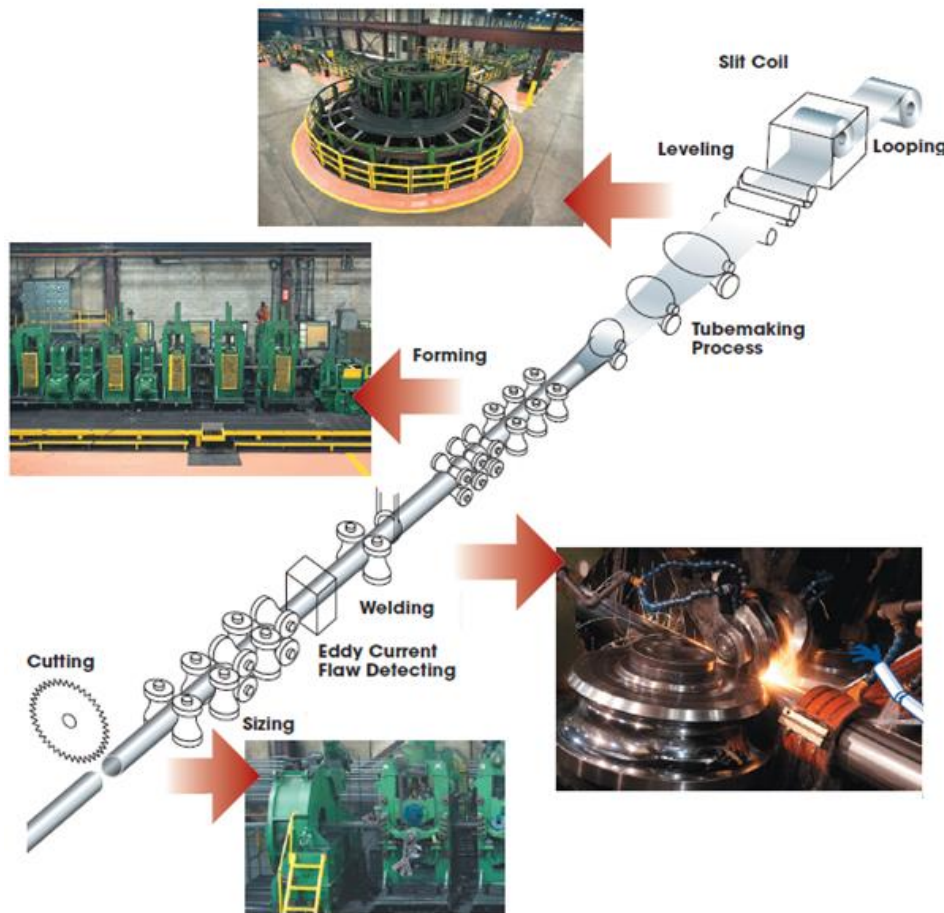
Manufacturing process for electric resistance welded tubes. The tubes progressively shaped into cylindrical tubes and welded (<http://www.leavitt-tube.com/manufacturing.html>).
